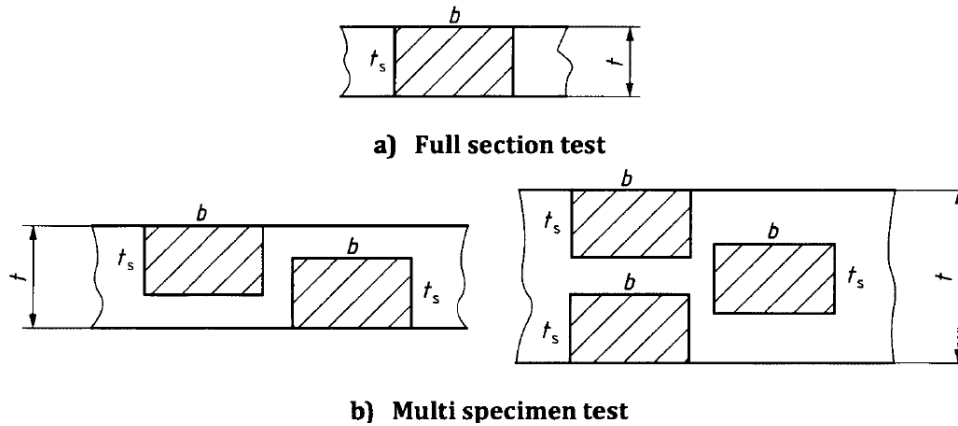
Examples of location of test specimens in joints. The test specimens can overlap.
